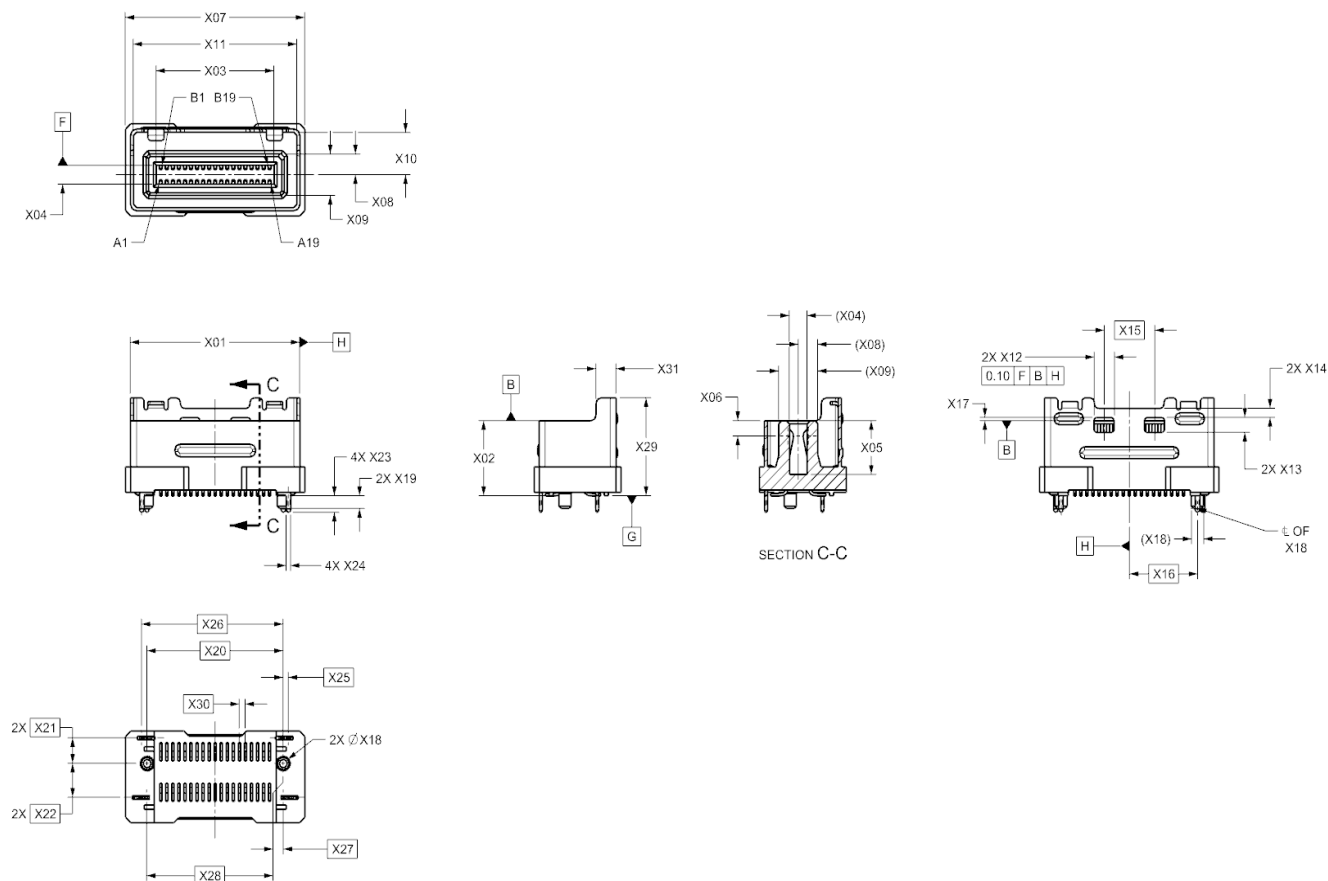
38-Pin Style A Connector Receptacle Dimensions
